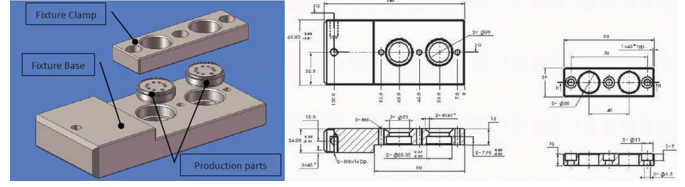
An assembly model and its engineering drawing of metal block fixture, consisting of a fixture base and a fixture clamp.
